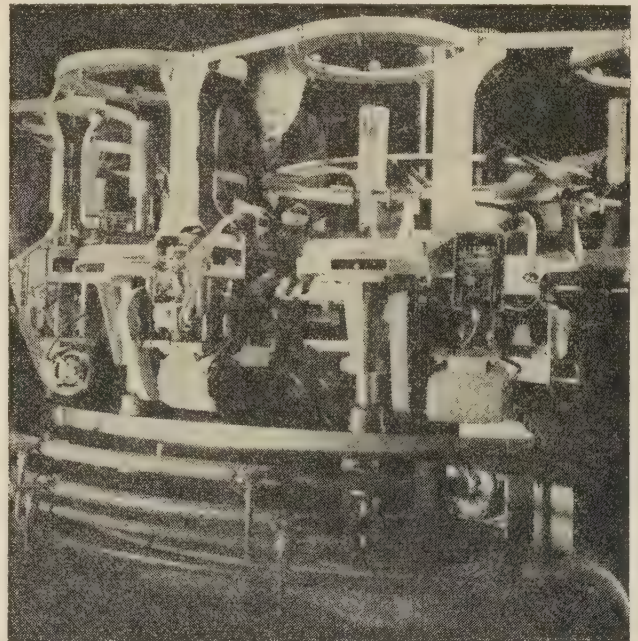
Constructing a 12-head cathode-ray-tube sealing machine.
